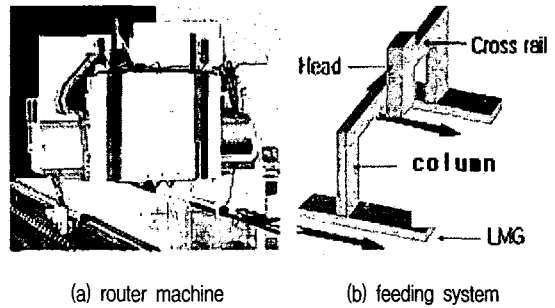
Schematic of a rack/pinion typed 5-Head Router Machine.
